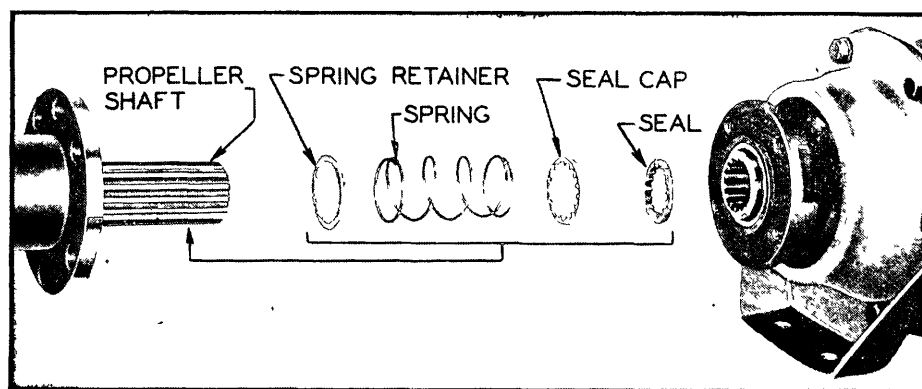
Propeller shaft spline oil seal on 1948-52 Dynaflo cars
